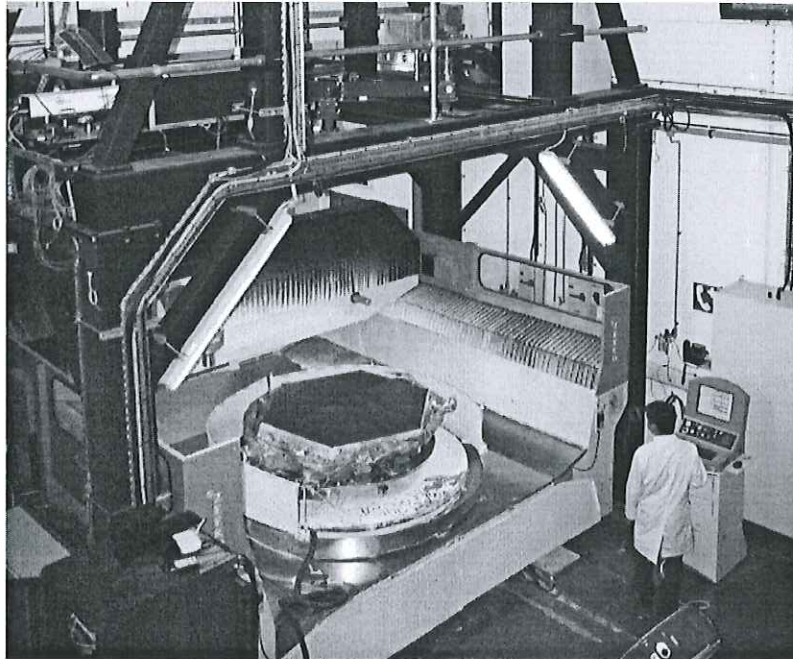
The ELT segment test in use at Glyndŵr University measuring a prototype E-ELT segment.
